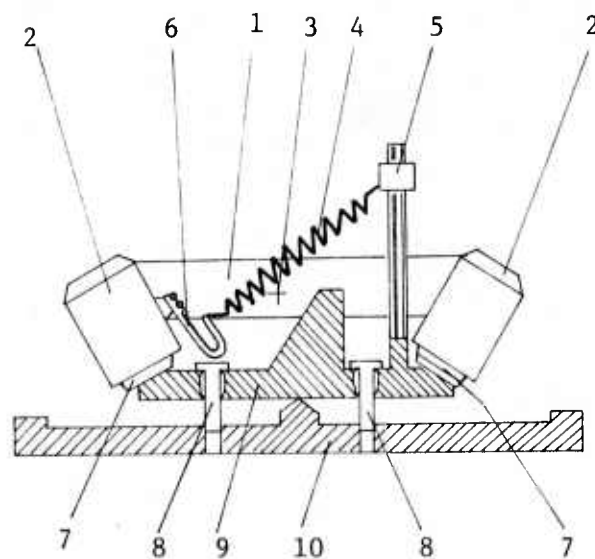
Schematic drawing of the SSS seismometer [6]
